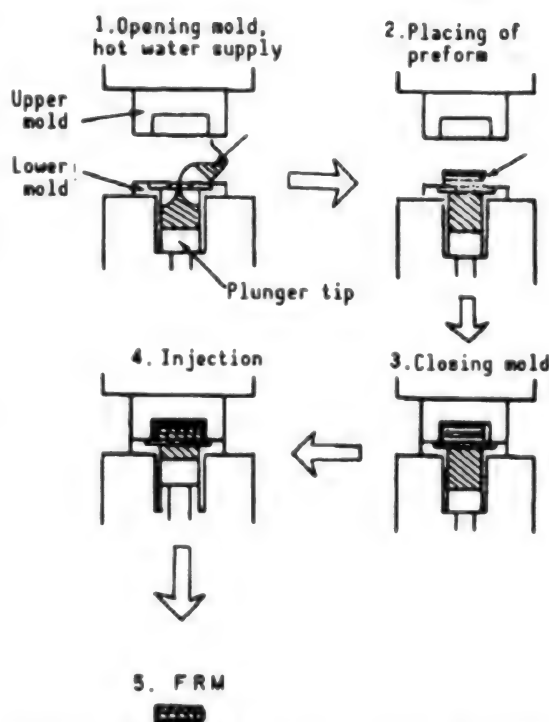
FRM Manufacturing Process Using Squeeze Casting
